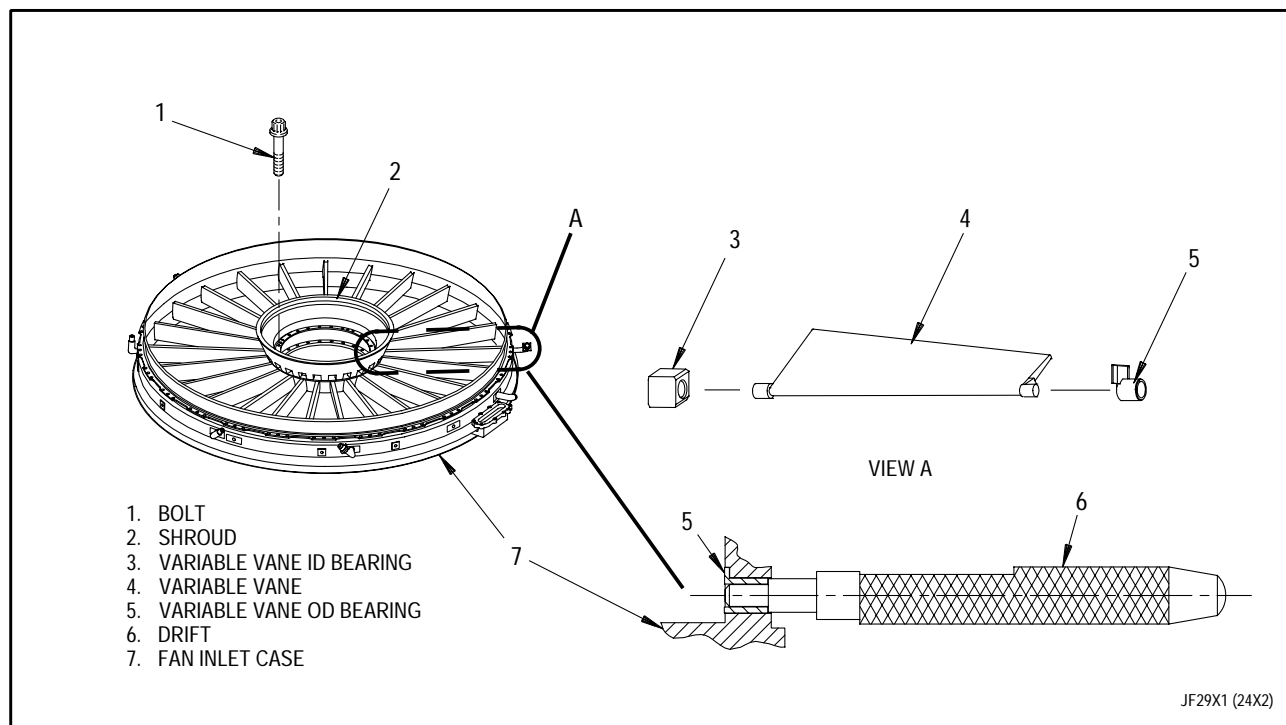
Front Compressor Stator Inlet Shroud and Front Compressor Stator Variable Inlet Vanes - Removal
